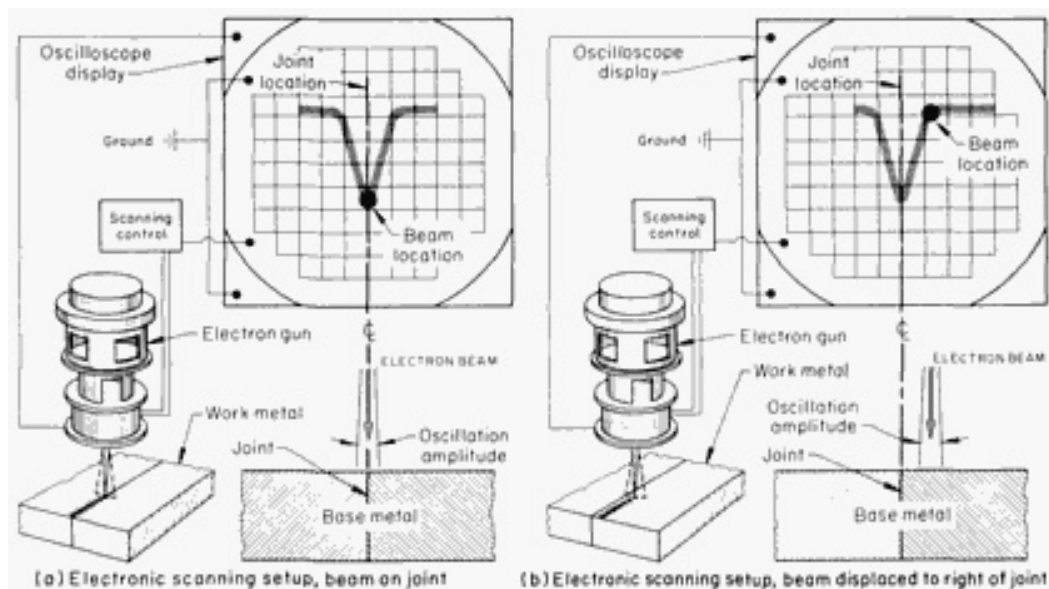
ELECTRONIC SCANNING APPARATUS WITH CRT DISPLAY TO SHOW ALIGNMENT OF ELECTRON BEAM RELATIVE TO WELD BEFORE WELDING OPERATION IS CARRIED OUT. (A) ELECTRON BEAM CENTERED ALONG LENGTH OF JOINT. (B) ELECTRON BEAM DISPLACED FROM CENTERLINE OF JOINT
